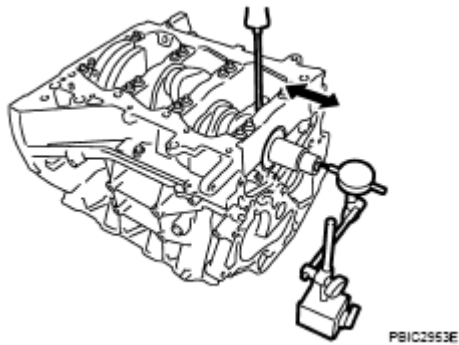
Measuring Clearance Between Thrust Bearings And Crankshaft Arm
